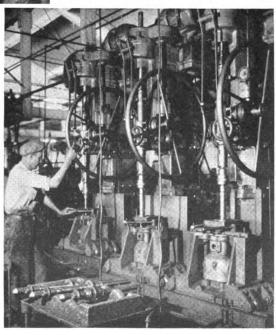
Here the cylinder for a triple-cylinder air conditioning unit is being finished to size by honing in a Hutto honing machine.
